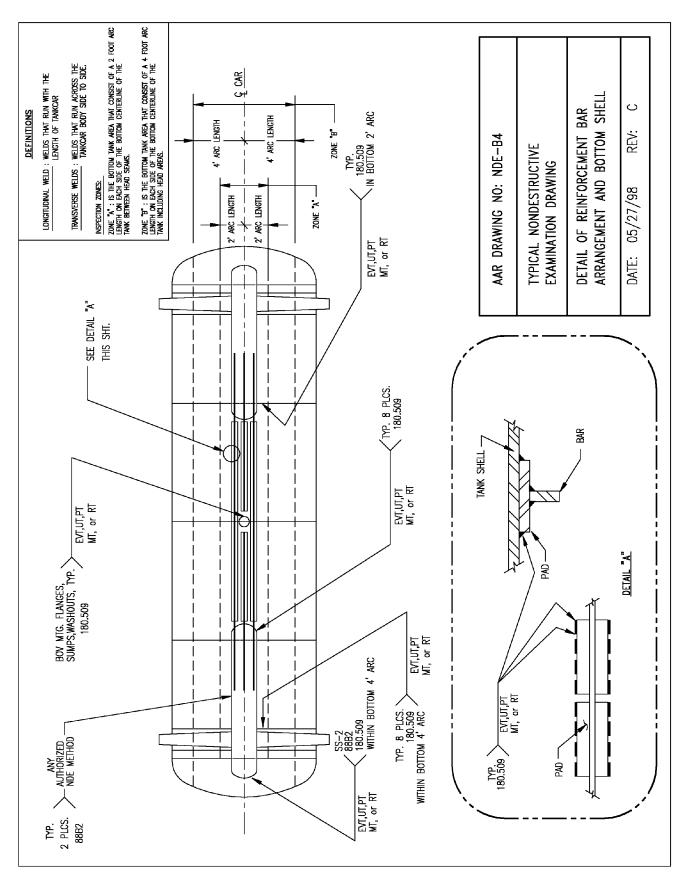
AAR Drawing No. NDE-B4 Detailing the Reinforcement Bar Arrangement and Bottom Shell
